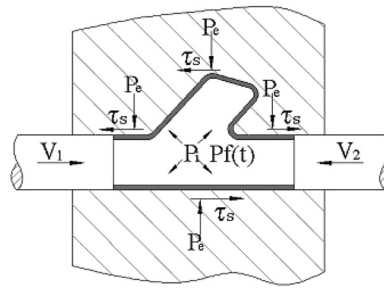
Die-workpiece interface variables at macro scale for tube hydroforming
